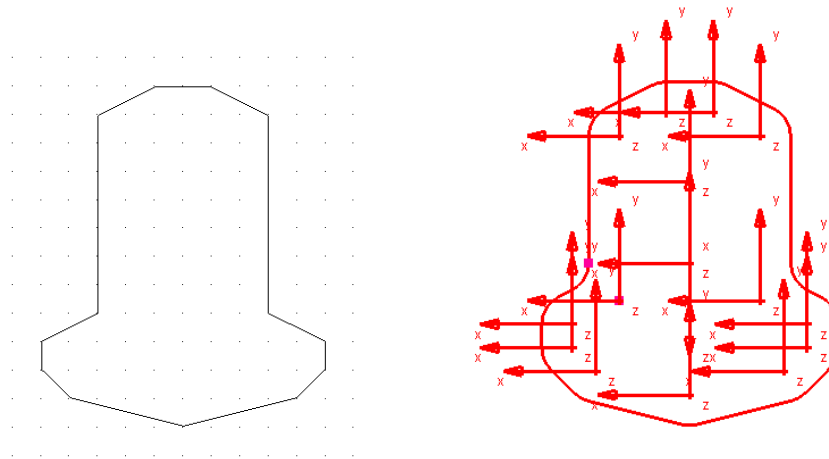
Adams/View Crankshaft Sketch and Final Model
